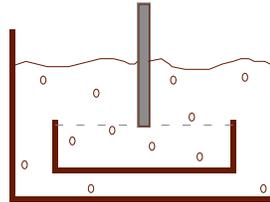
De-gassing of the mold in the vacuum chamber.
